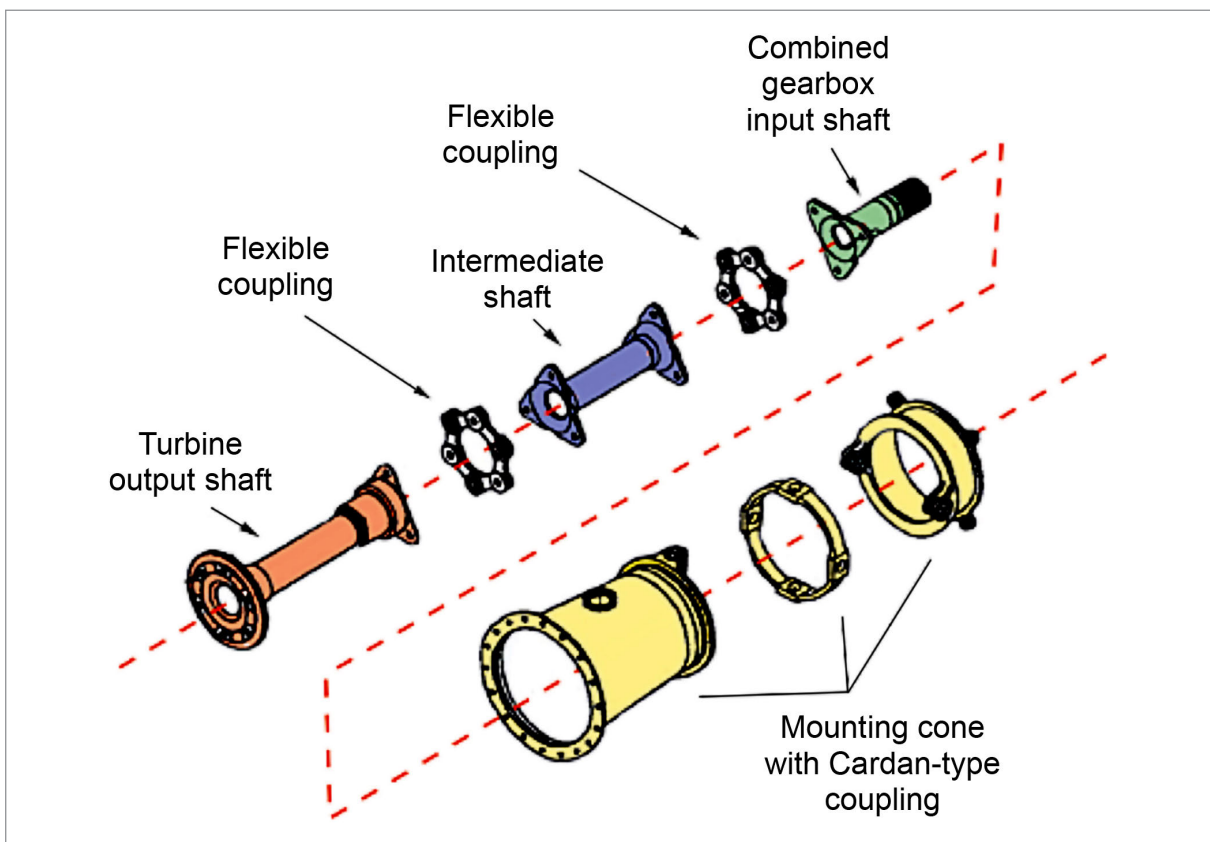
Exploded view of the parts that comprise the shaft, from the turbine to the combined gearbox, and its outer case (mounting cone)
